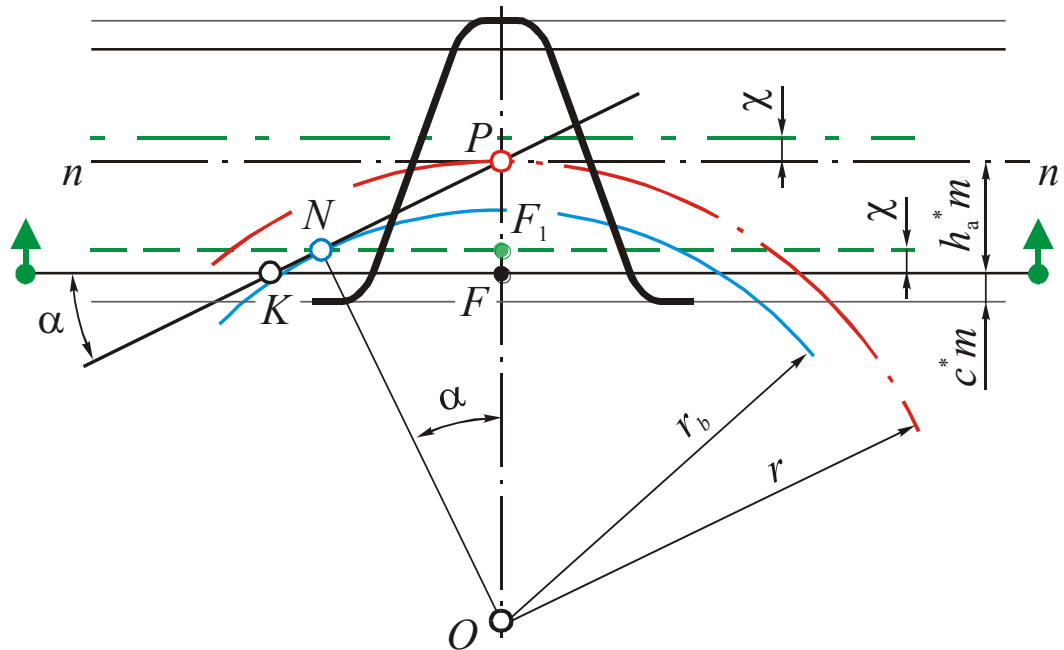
Scheme of rack and blank teeth engagement, when undercutting of roots takes place
